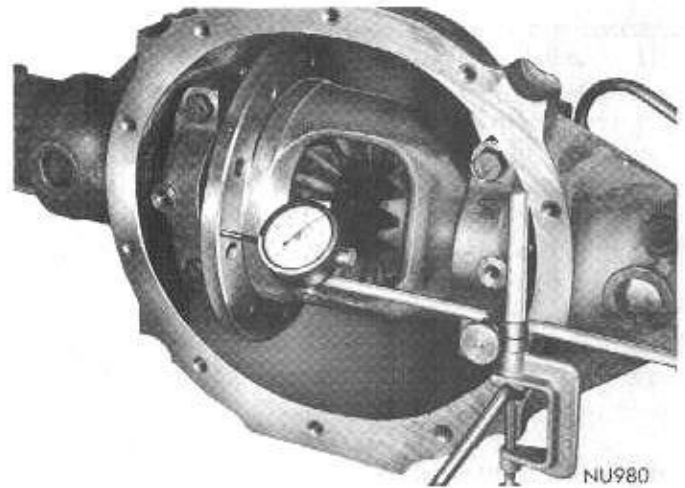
Checking Drive Gear Mounting Flange Face Runout
